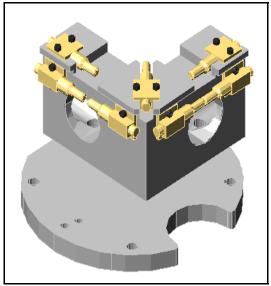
7 Array Fixture mounted on the Head Accelerometer Mounting Plate.
